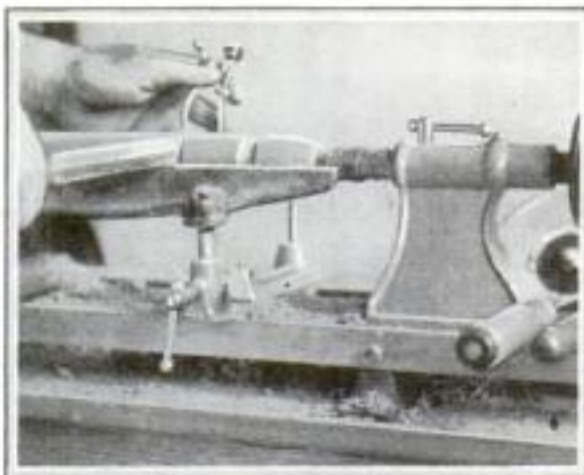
How the calipers and the parting tool are held when making the sizing cuts.
